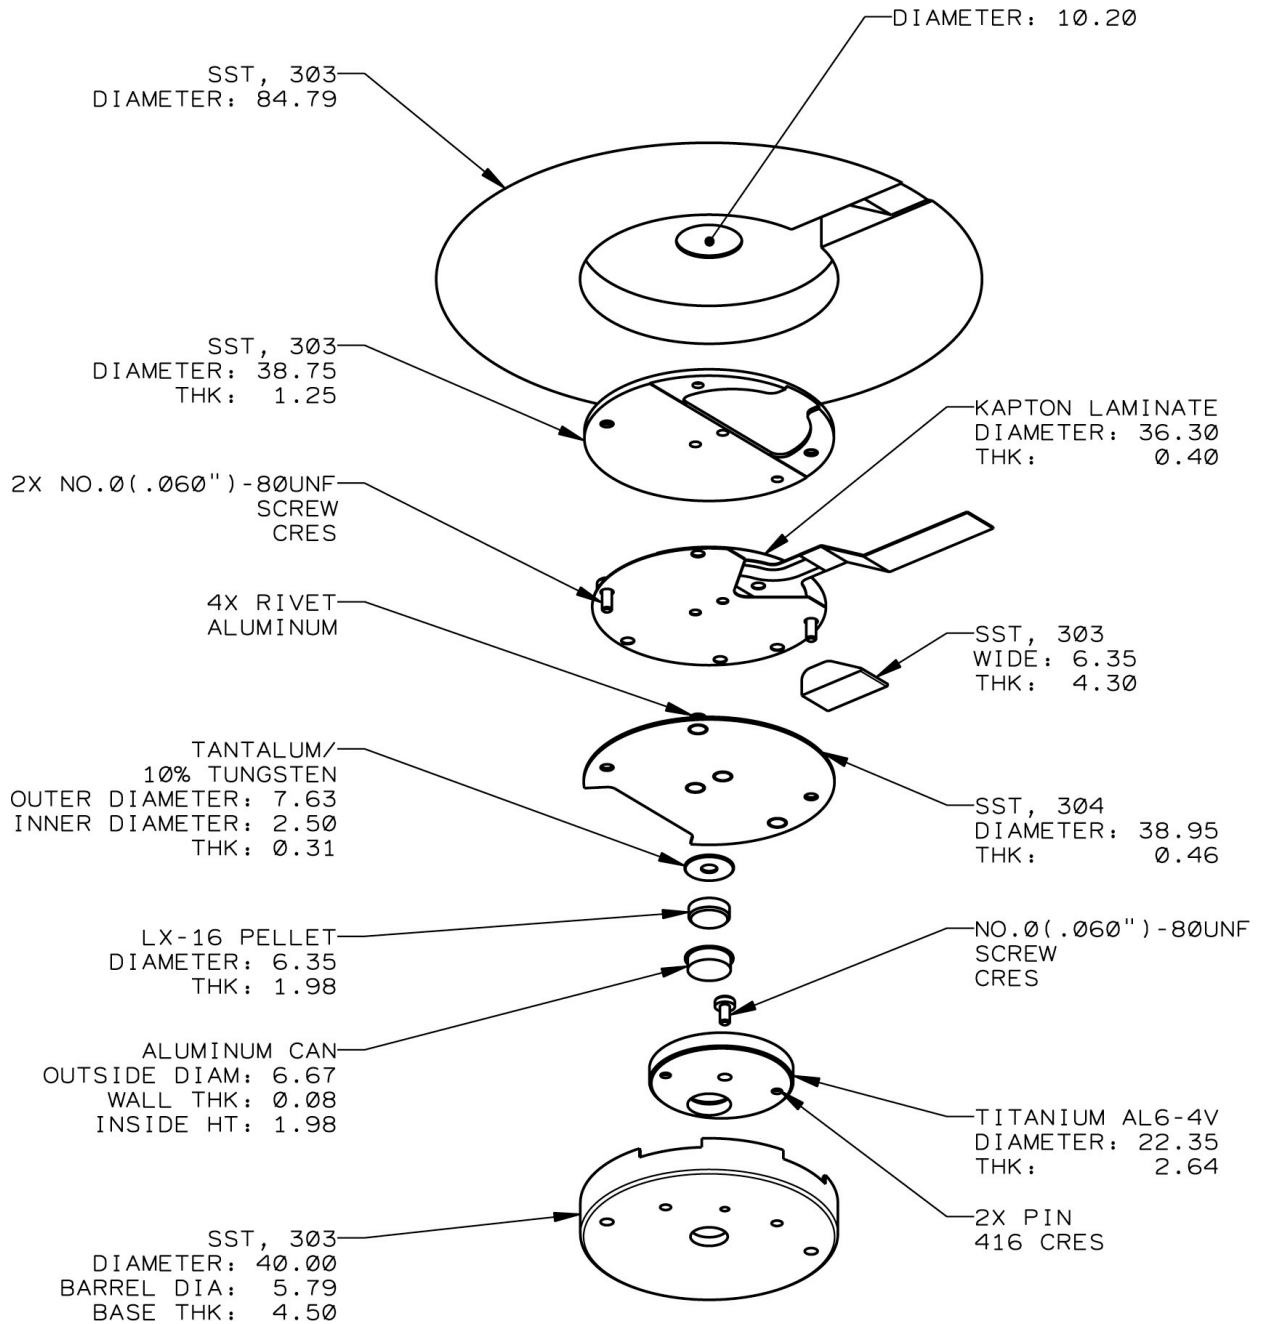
2021E PT7 Shadowplate: Full Assembly Exploded Diagram
